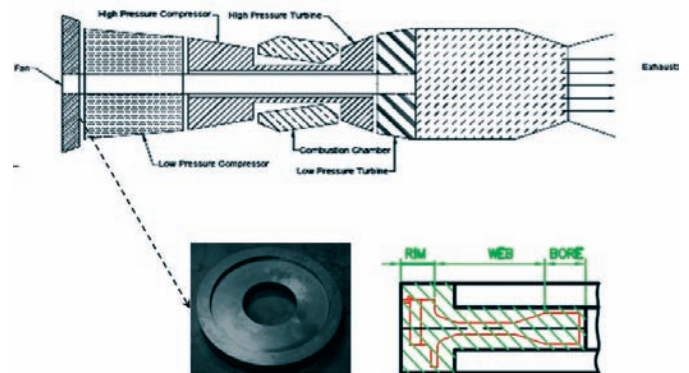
Sectional view of the aero engine and its machined forging (schematic drawing showing the final component in phantom line) for which the present cut-up evaluation is conducted in the present study.
